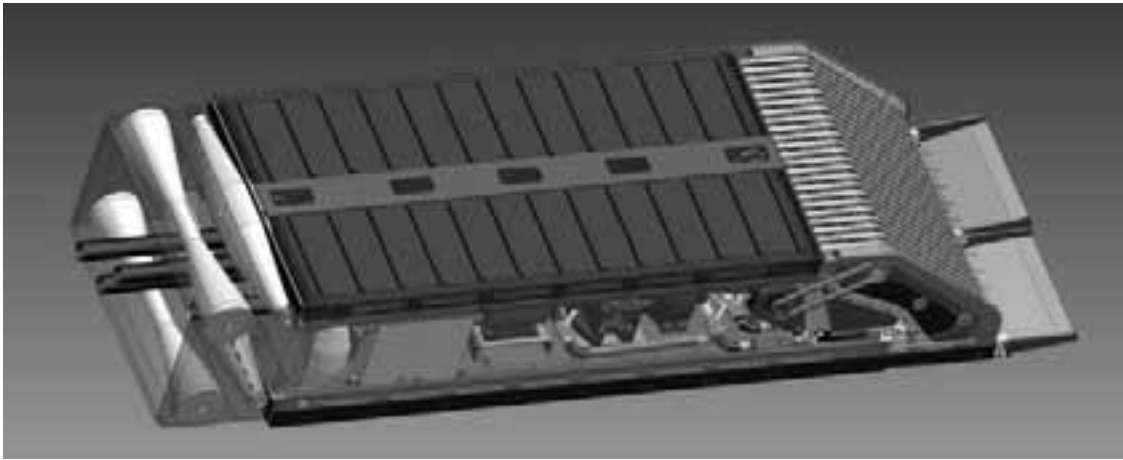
Dual track drives on the top surface of the SORDMiner head model
